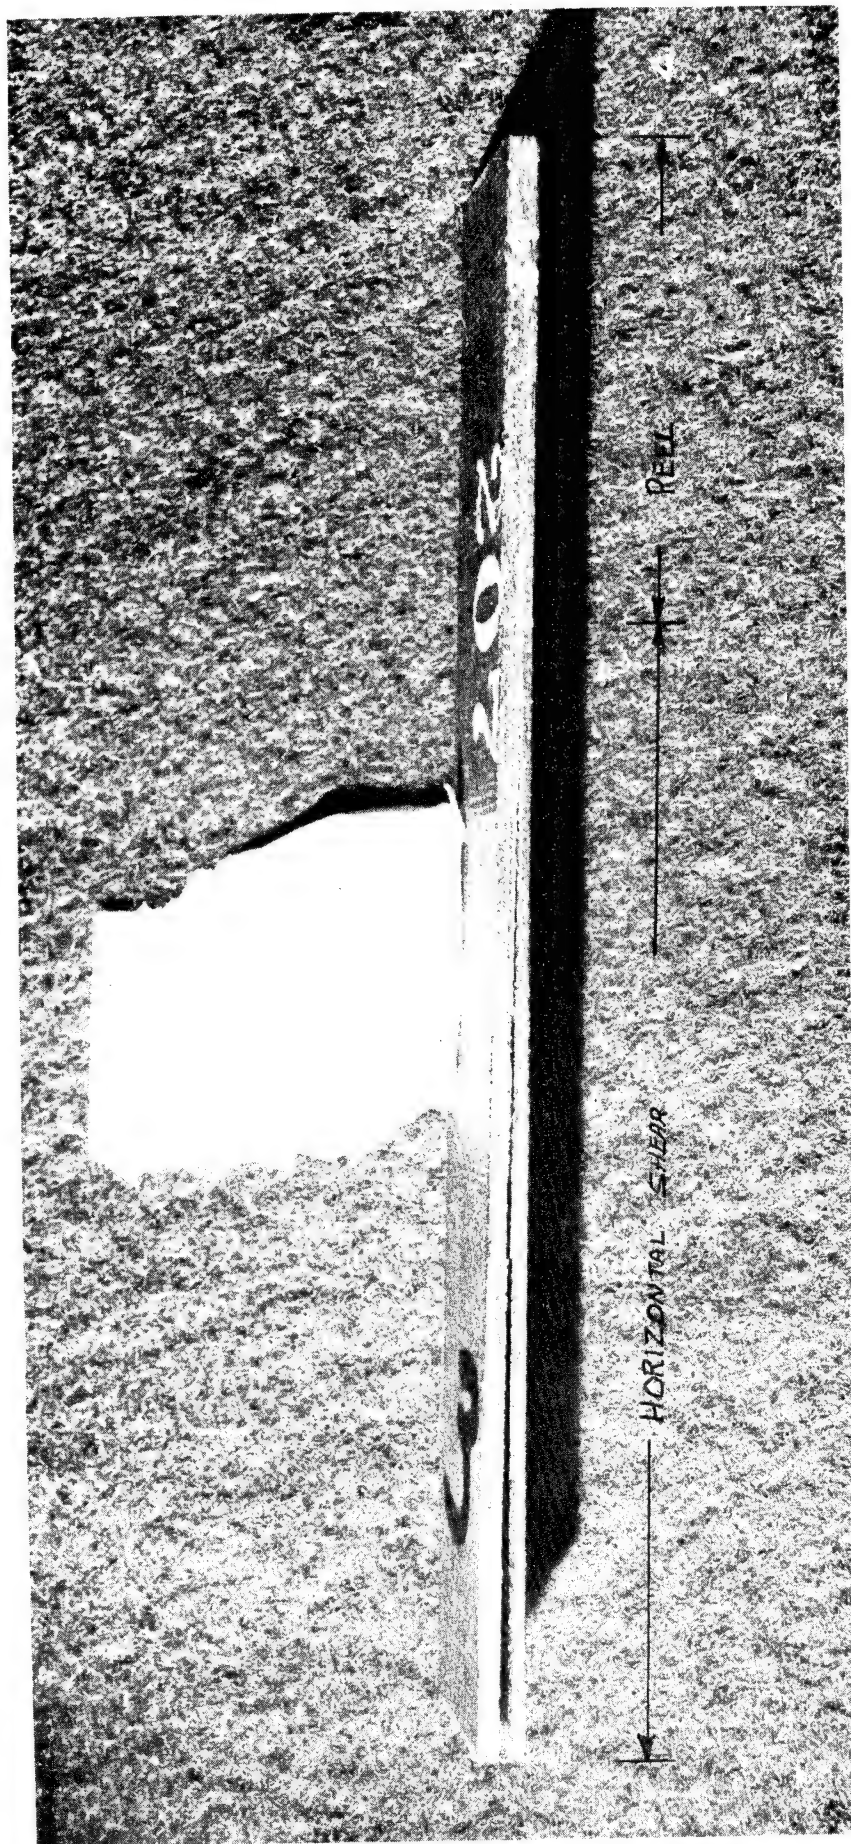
Boron Flexure Specimen - Horizontal Shear Failure
